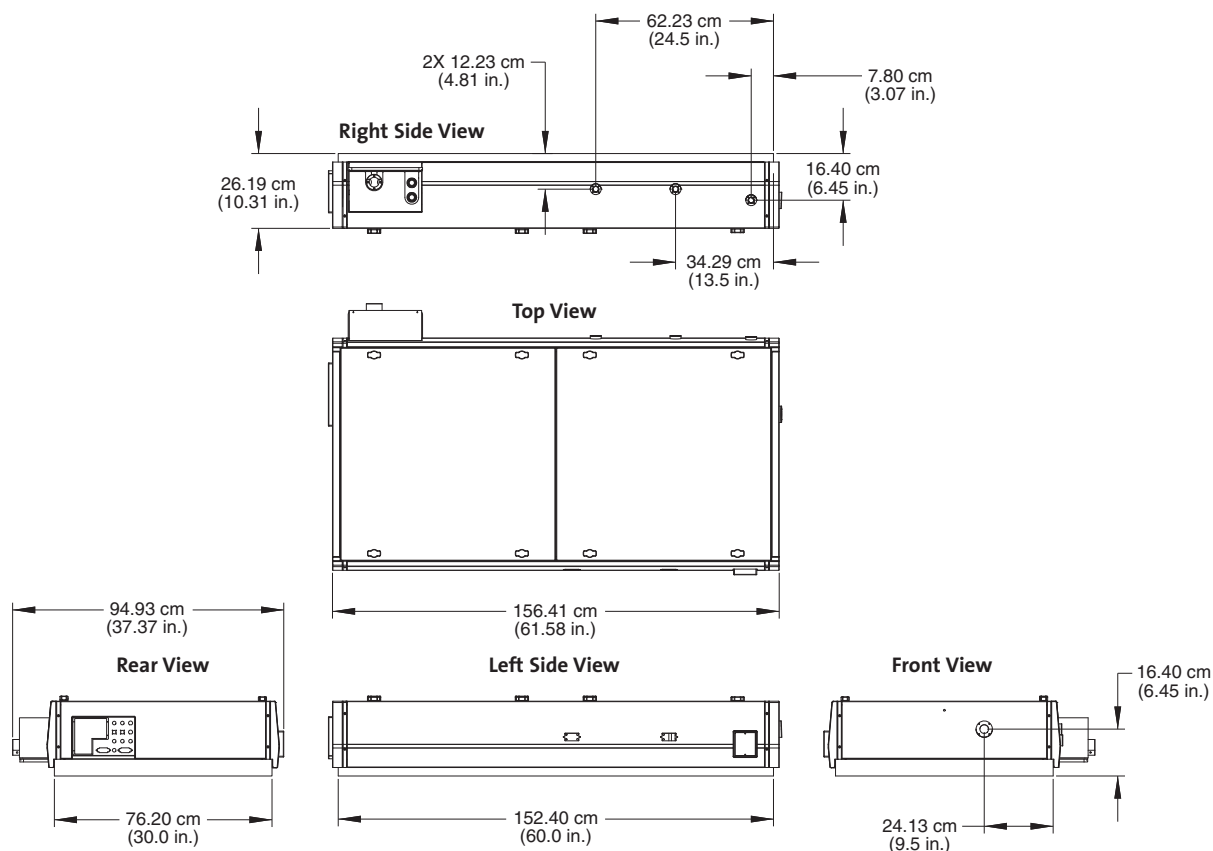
Legend Elite Duo HE+ Optical Bench Assembly Dimensions
